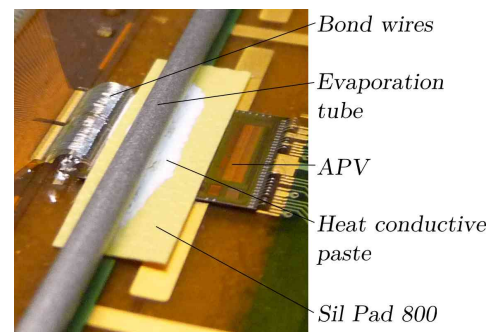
A close-up view of the assembled Sil Pad between tube and APV.
